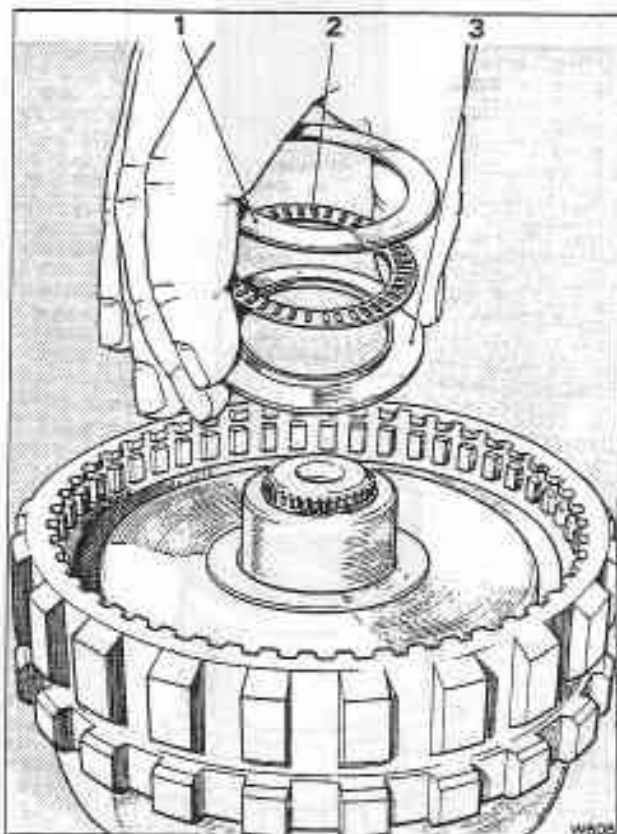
Fitting the races and thrust bearing to the outer face of the rear internal gear
